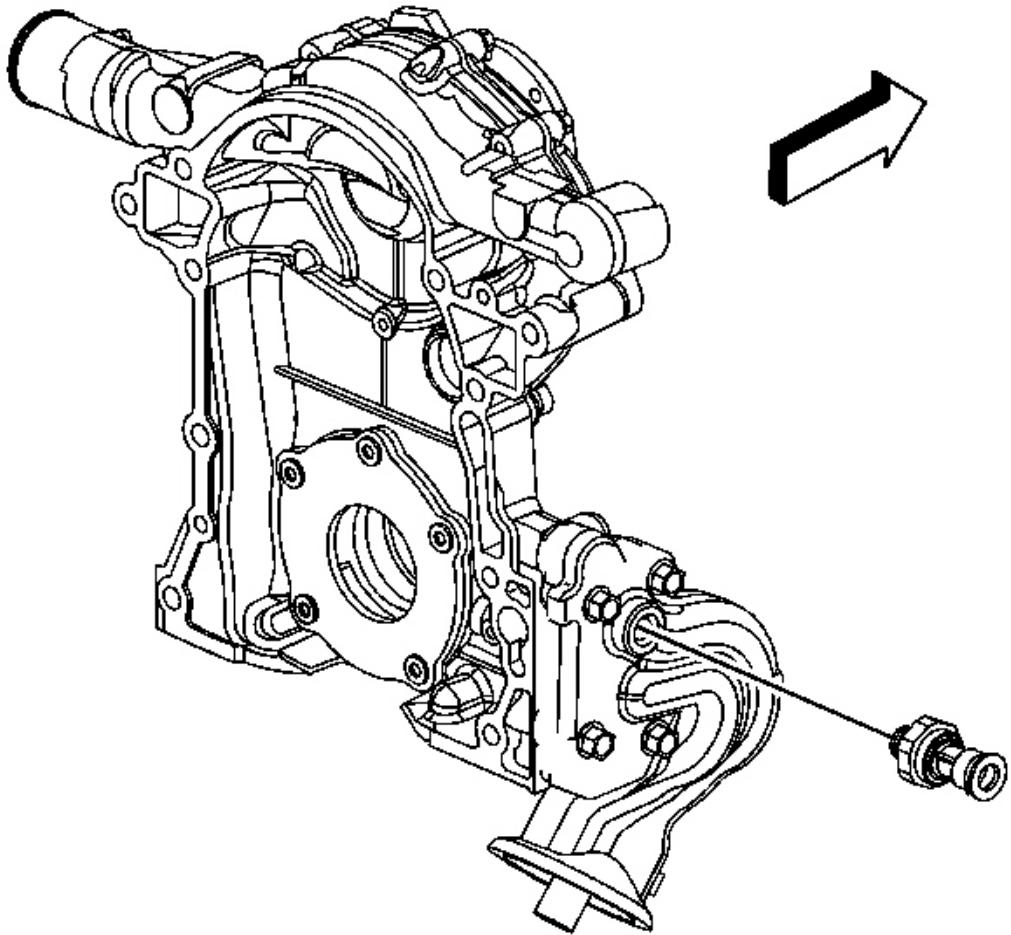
Identifying Oil Pressure Sensor Connector
